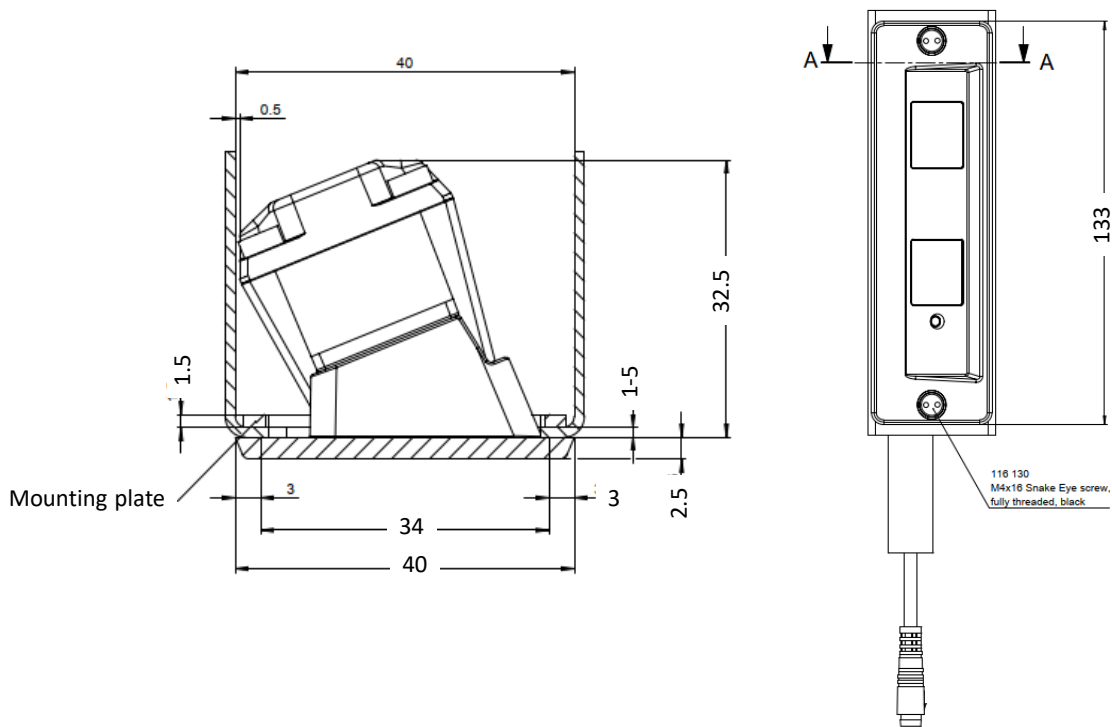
CabSafe 3D installed with flush mounting bracket and mounting plate
